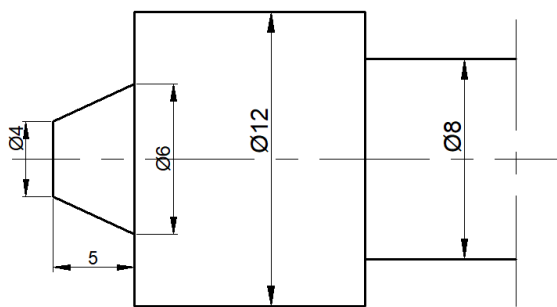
A schematic illustration of the tool (Dimensions in mm).
